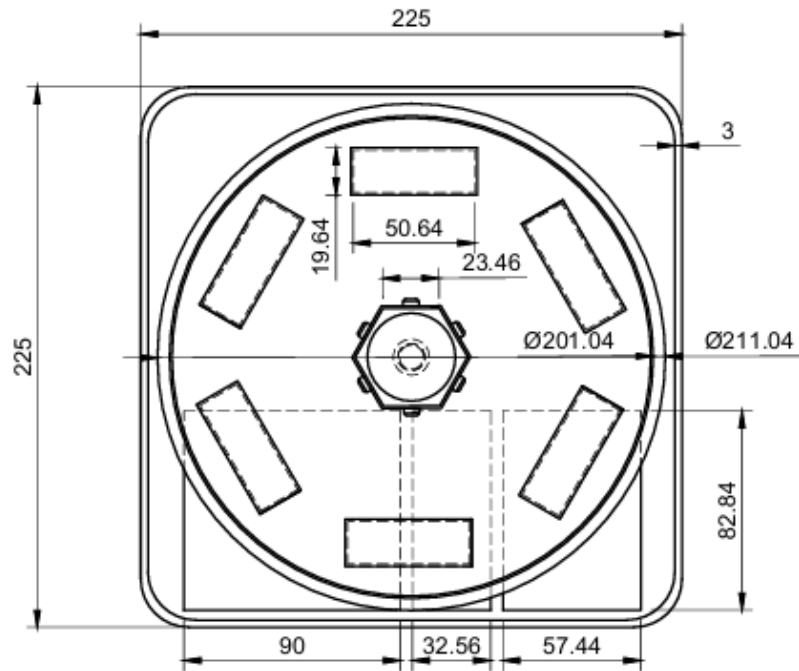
Top view of 2D technical design of CAMINO with dimensions
